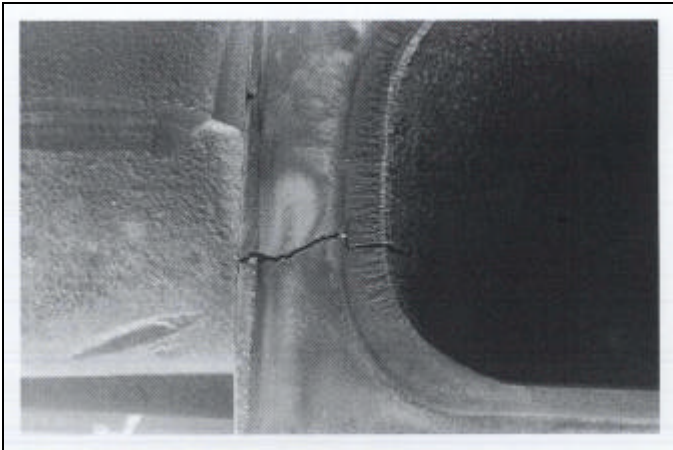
Inlet Flange Crack on Housing Subjected to Aggressive Field Duty Cycle
